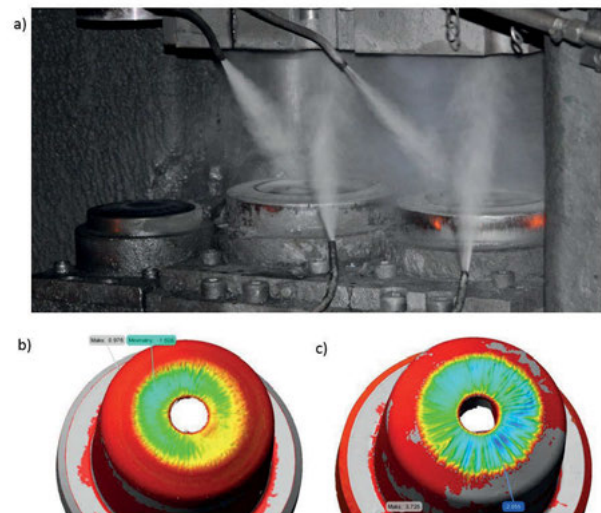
A view of: a) standard technique of lubricant distribution, b) tool wear in the case of a uniform lubrication and c) tool wear in the case of a non-uniform lubrication
